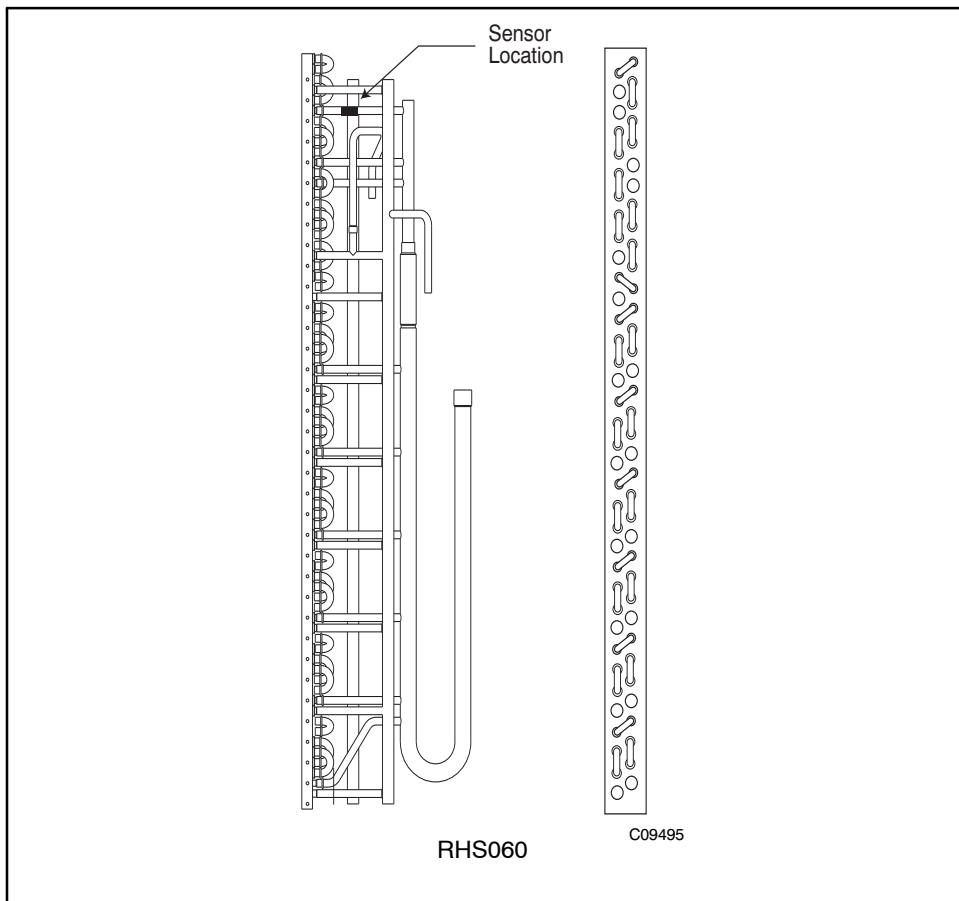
Motormaster® II Sensor Locations – 5 Ton Heat Pump Units
